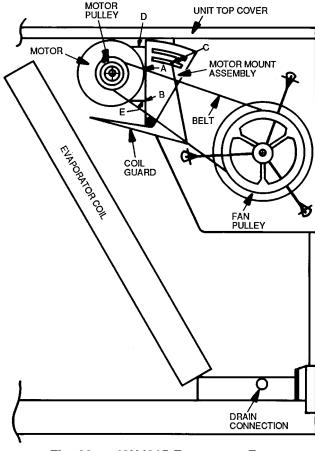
48HJ015 Evaporator-Fan Motor Adjustment
